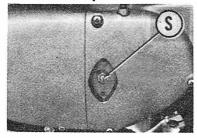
Clutch adjusting screw (S) is located under small plate on left side of engine. Make certain that lock nut is tightened after adjustment is complete.
